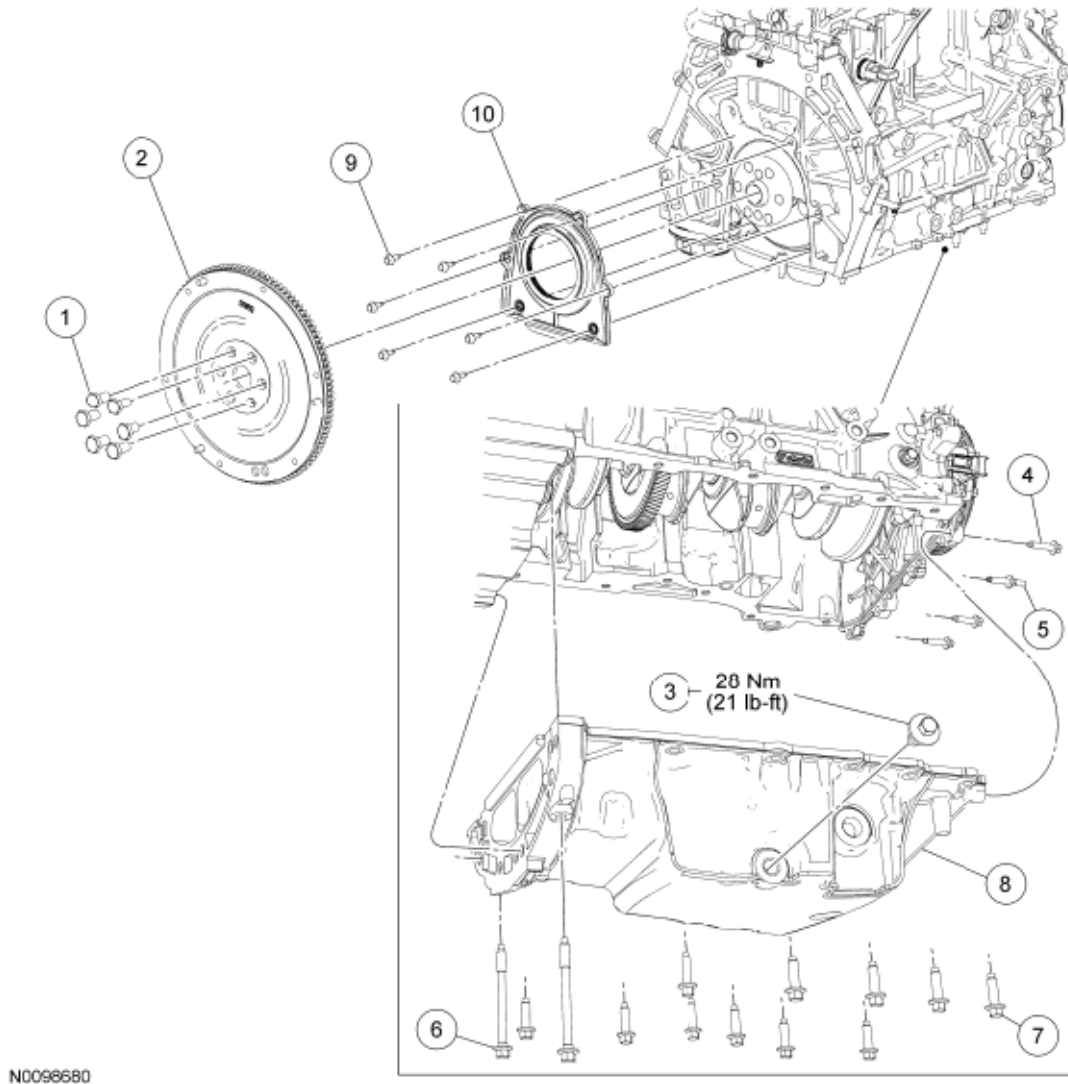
Identifying Lower End Components - Flexplate, Flywheel And Crankshaft Rear Seal With Torque Specifications
